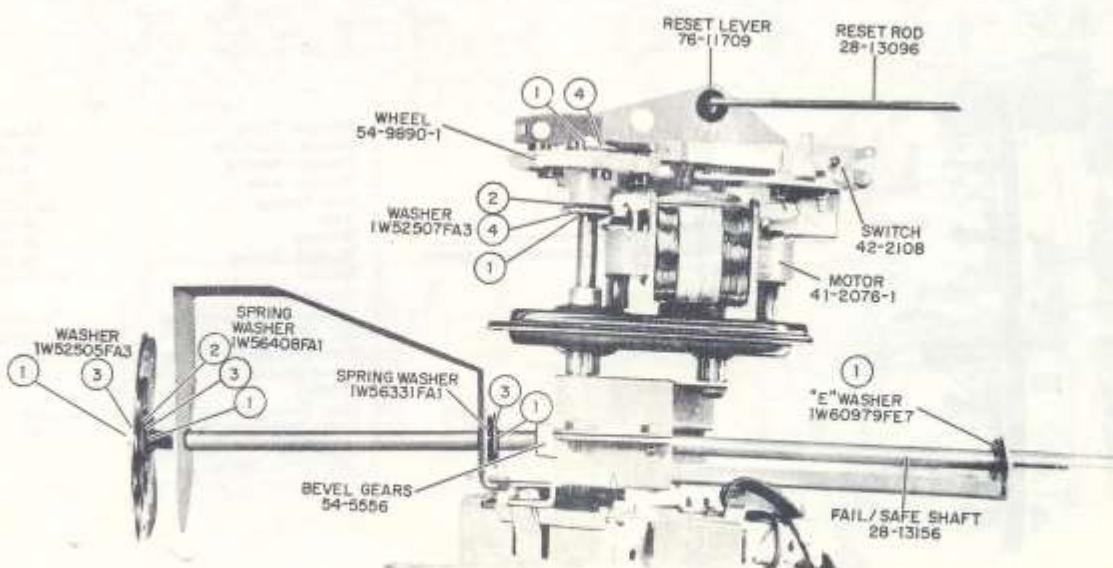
Stepper, Channel Indicator, Reset and Fail-Safe Assemblies
